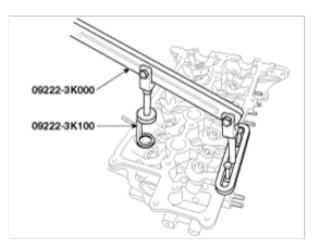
Compressing Valve Spring Using SST (09222-3K000 And 09222-3K100) Courtesy of HYUNDAI MOTOR AMERICA
